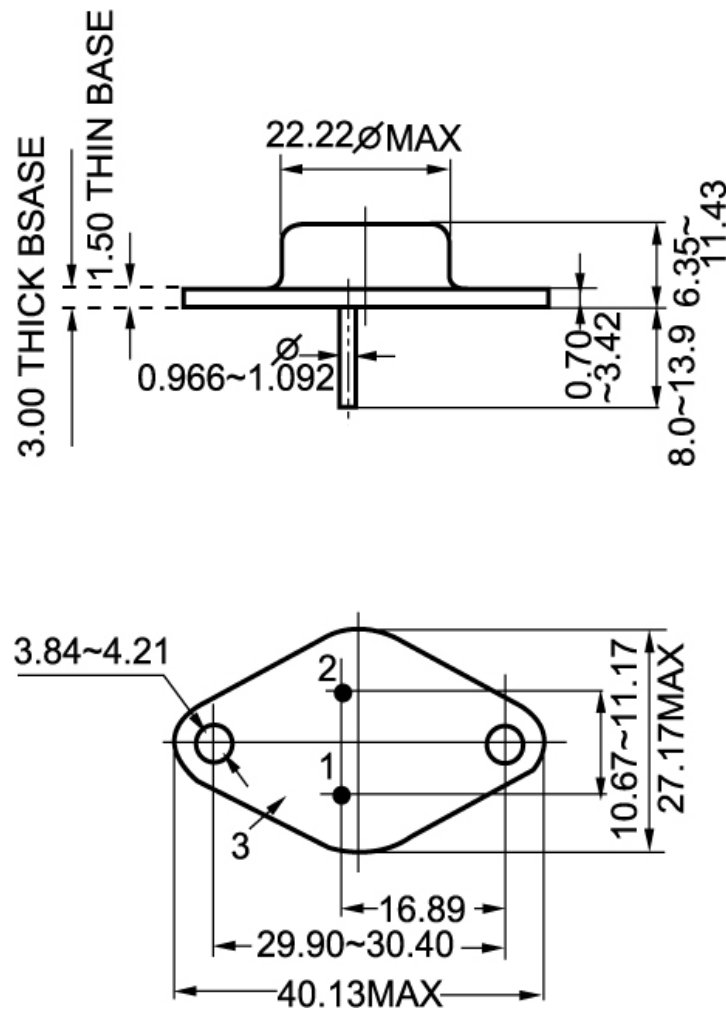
outline dimensions (unindicated tolerance: $\pm 0.1\text{mm}$)
